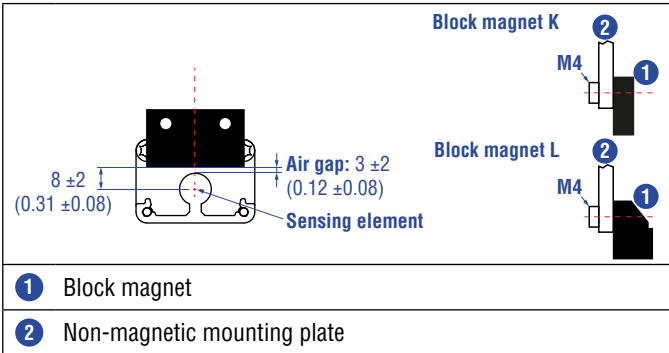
Mounting of block magnet K (part no. 251 298-2) and block magnet L (part no. 403 448), example of EL sensor
